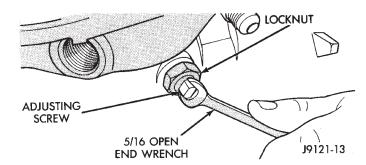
Tightening Front Band To Hold Front Clutch In Place—46RH
